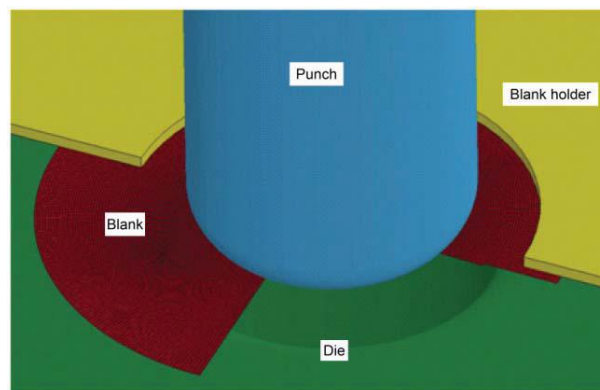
A model of a configuration of the deep drawing tools assembly [10]
